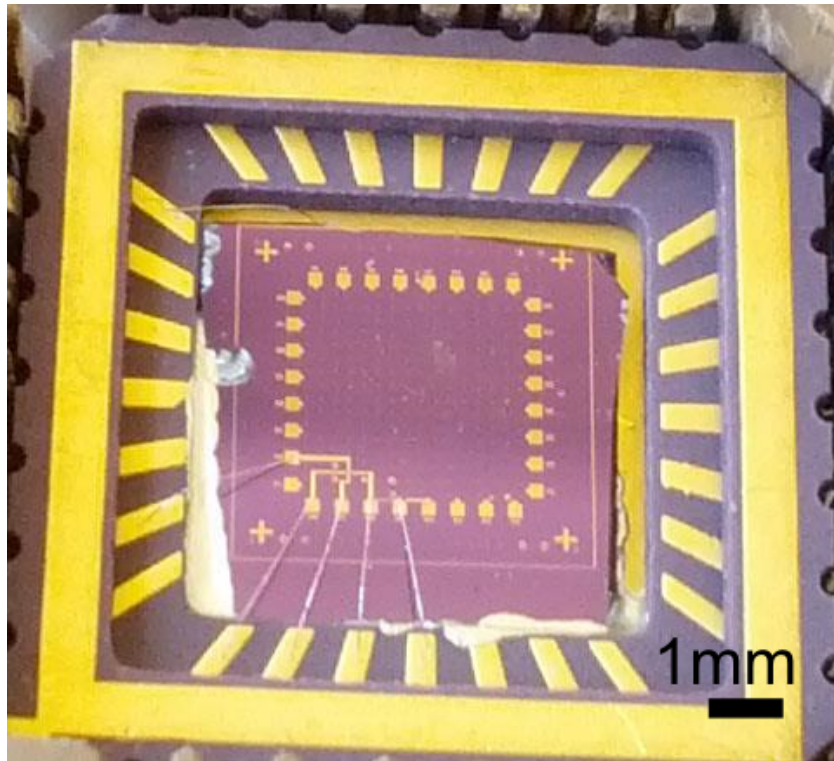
A sample which has been wire bonded to a chip holder. The chip is secured to the chip holder with silver paste. 5 bond pads are connected on this sample and one wire is connected to the baseplate of the chip holder to form the backgate.
